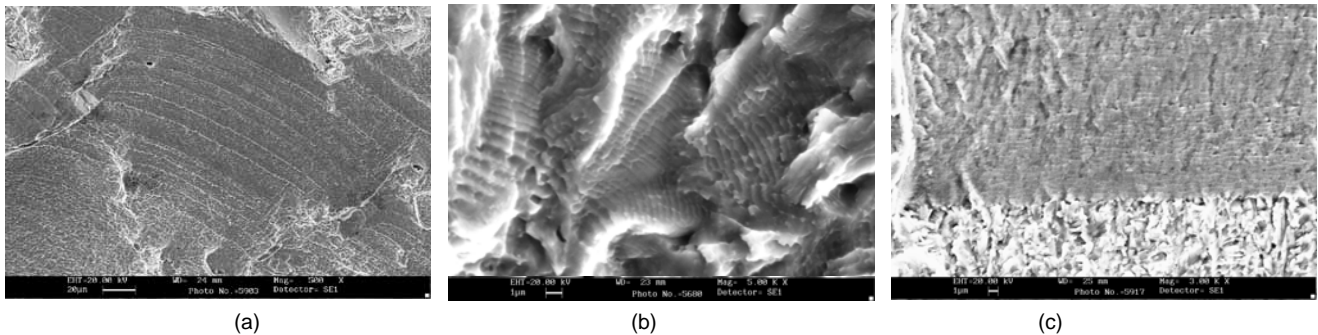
Fracture Surface of the LPTR Blade of Aero Engine
